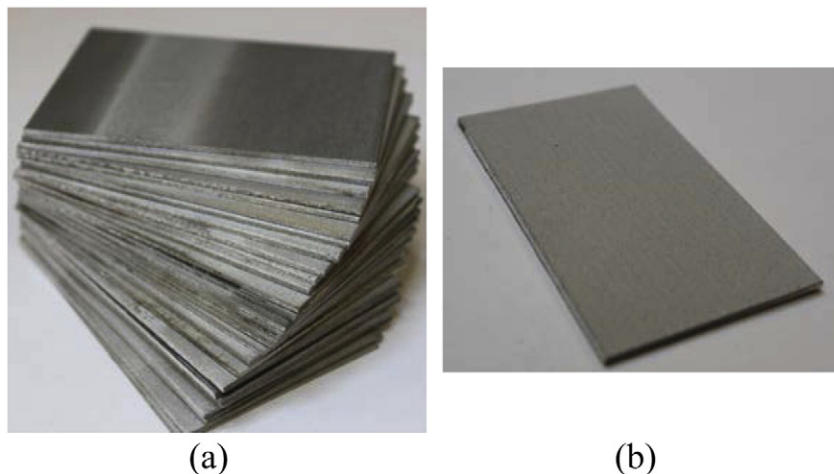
(a) Bare and (b) Al cold spray coated coupons for corrosion testing.
